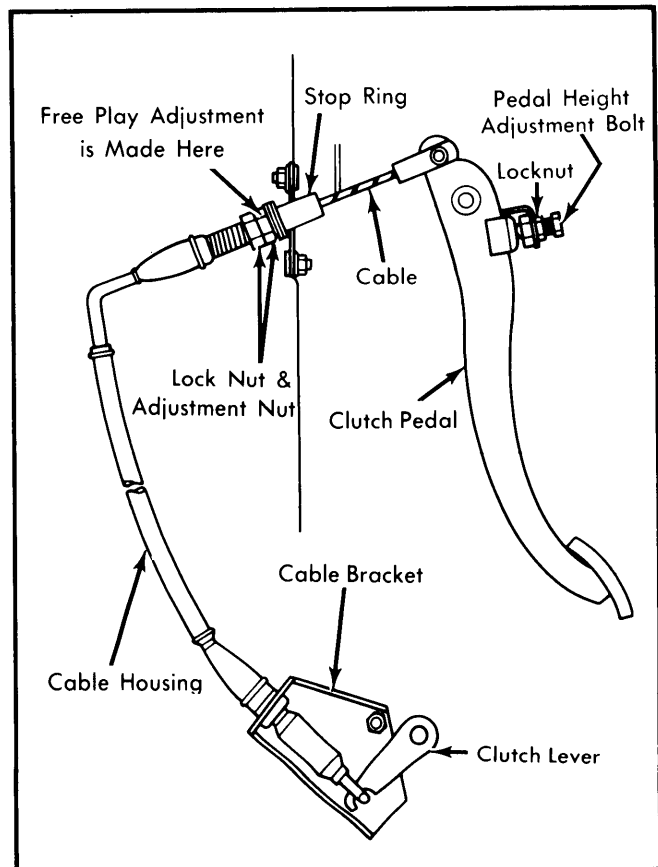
Installed View of Clutch Cable with Detail of Items to Disconnect for Cable Removal. Illustration Also Shows Pedal Height Location.
